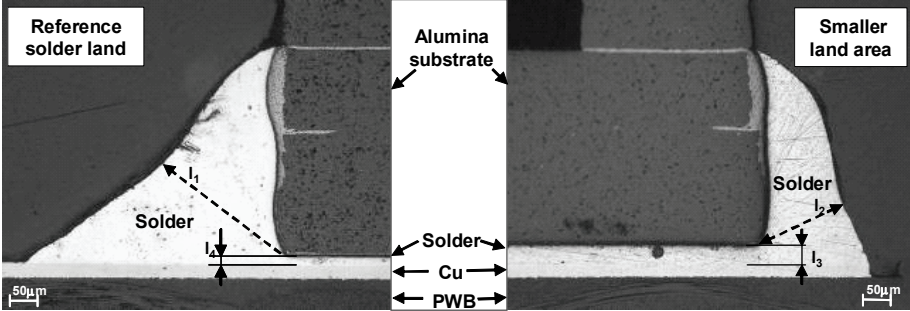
Micro sections of the solder joints of the reference and the smaller solder land geometry of CLLCC component. The solder thicknesses are denoted as l_1 and l_2 . The shortest path for the crack from underneath the component to the surface of the solder is denoted as l_3 and l_4 .
